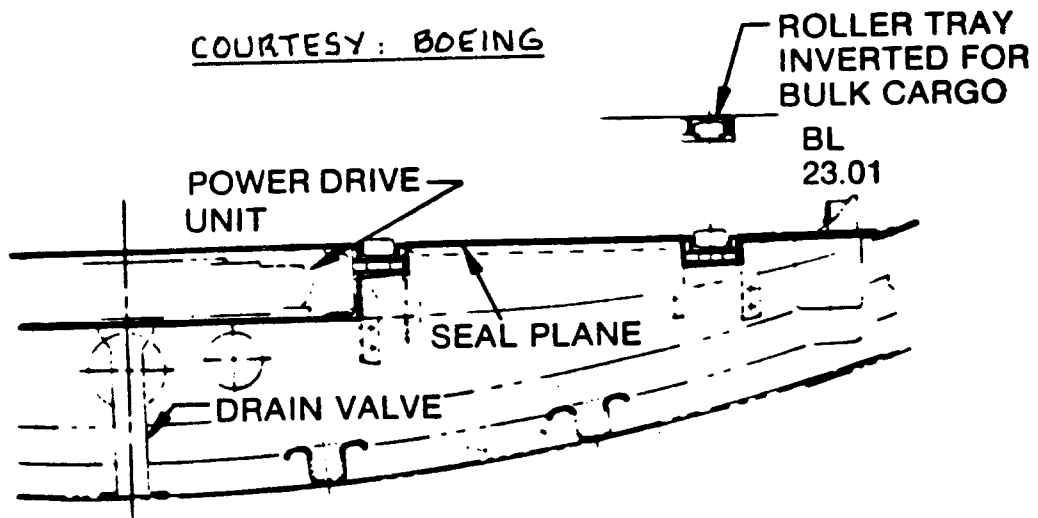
Cargo Floor Installation: Boeing 767-200
